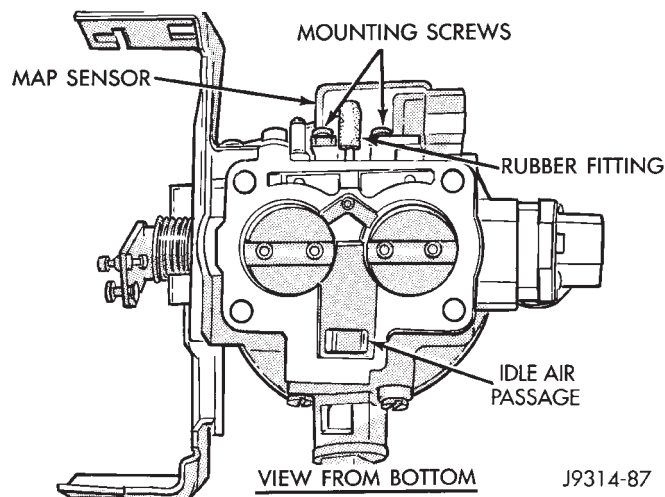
MAP Sensor L-Shaped Rubber Fitting—5.2L Engine
